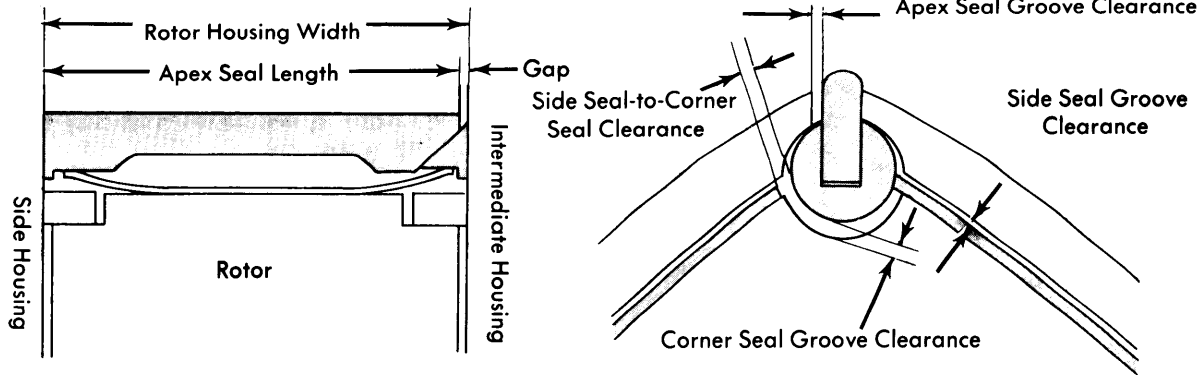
Measuring Clearance of Apex Side & Corner Seal
